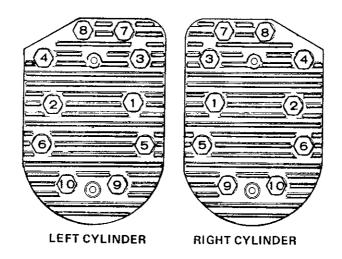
HEAD BOLT TIGHTENING ORDER
